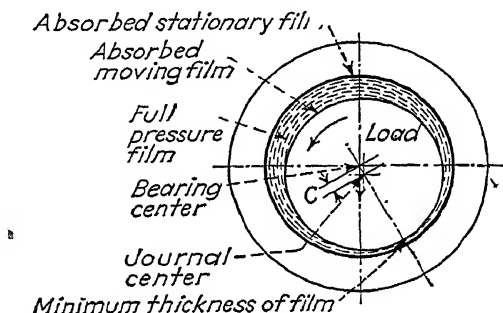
Journal rotating in a sleeve bearing. (Clower, "Lubricants and Lubrication," New York, 1939.)
